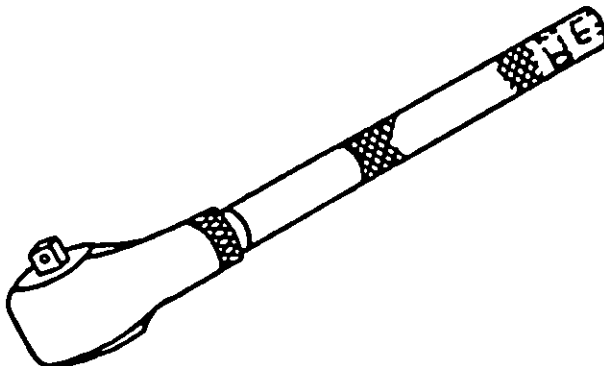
Type III, class 6 handles, socket wrench, extension, torque transmitting, 90° head, square drive.
